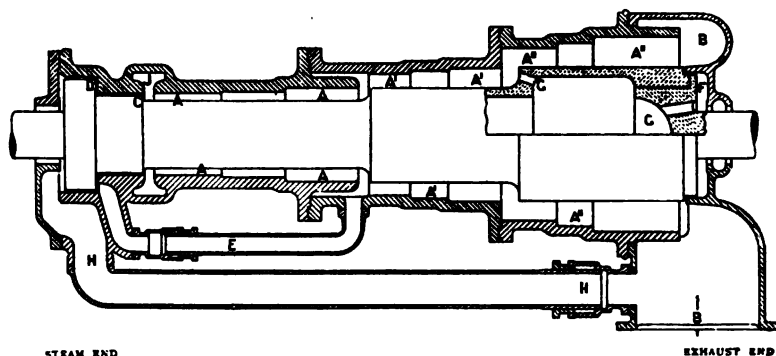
Longitudinal Section through Willans-Parsons Steam Turbine.
